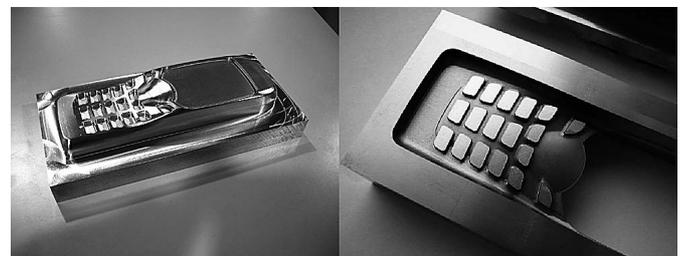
Copper electrode of cellular phone and machined surface after electrospark machining
